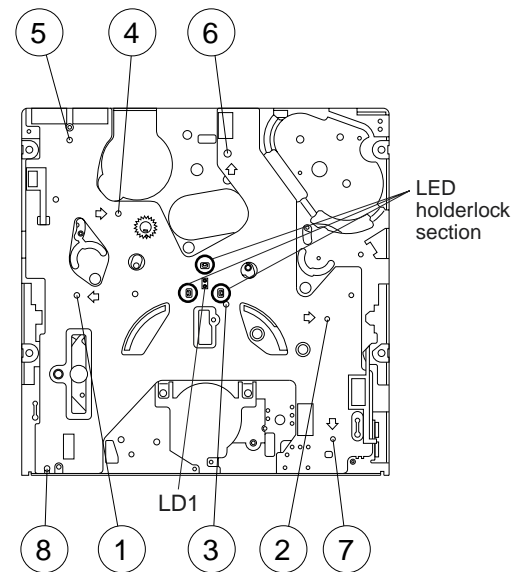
(2) — Mechanism unit bottom side —
